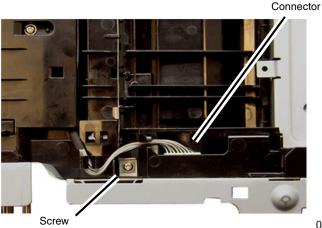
Drive Motor Connector & Ground Clip (Bottom View)
